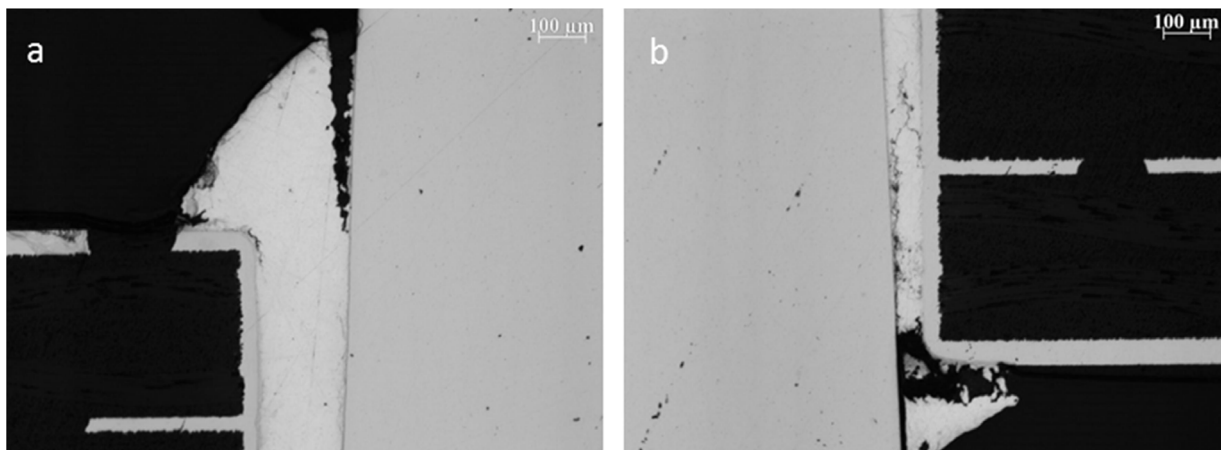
Typical crack initiation locations and crack propagations in THT solder joints during thermal shock cycling. a), crack initiation at the solder/pin interface, crack propagation along the solder/pin interface, b) crack initiation at the solder/PCB interface, crack propagation along the solder/pin interface and inside the solder
